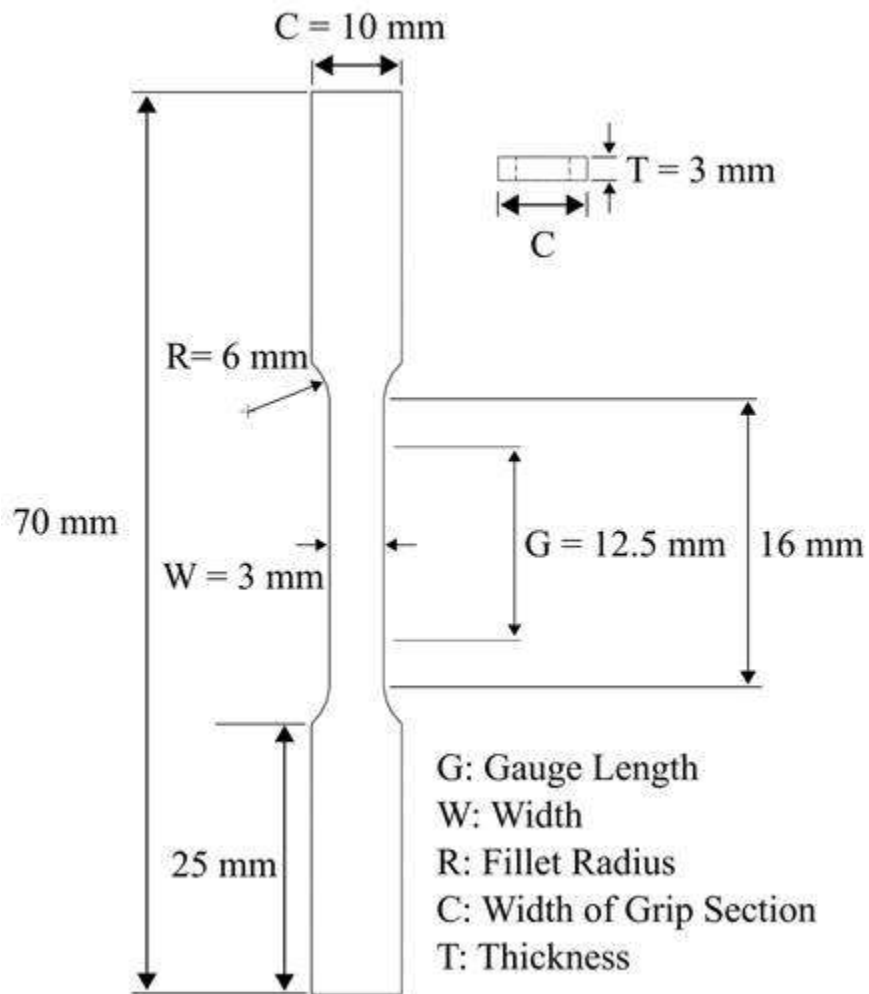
ASTM E8 / E8M standard tensile sample dimensions
